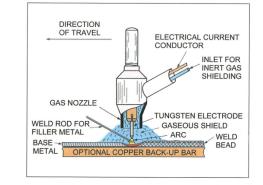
Schematic Representation of Gas Tungsten Arc Welding
